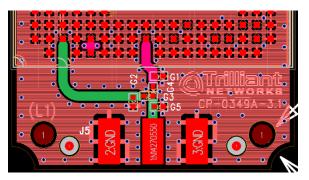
FCC and ISED approved trace design layout and picture for external antennas of section 4.3
